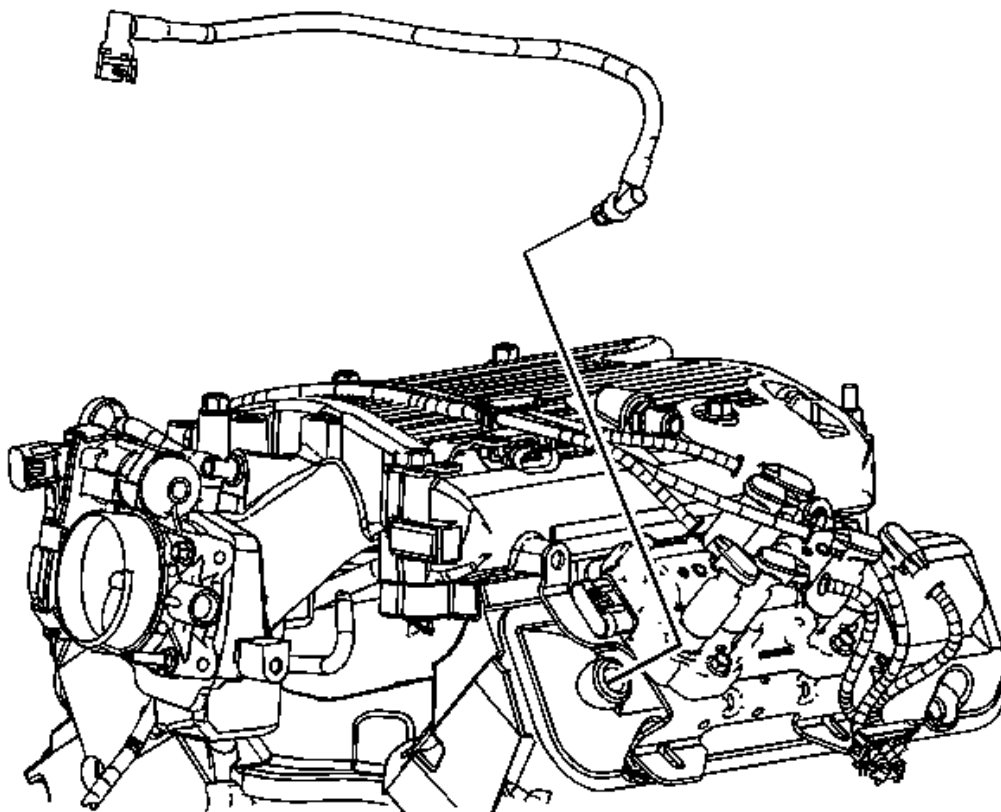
Identifying Positive Crankcase Ventilation (PCV) Fresh Air Tube
